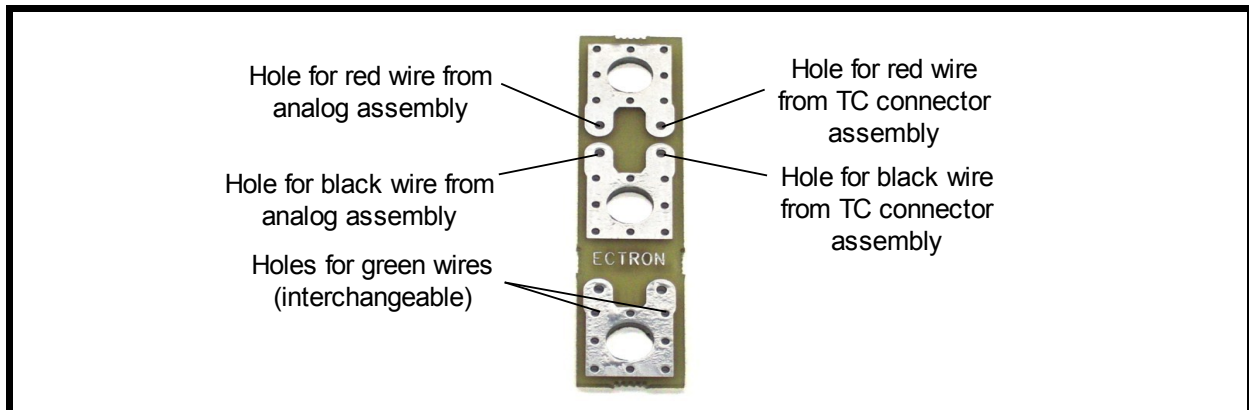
Wire Connections on Binding Post Printed Circuit Board
